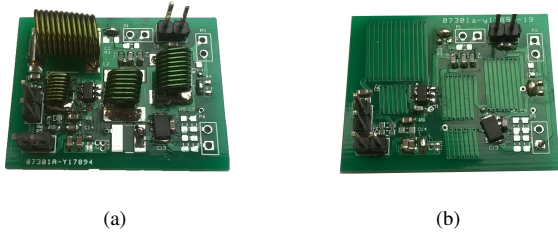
Unidirectional converter prototypes with diode rectifier, (a) with discrete inductors and (b) with PCB embedded inductors
